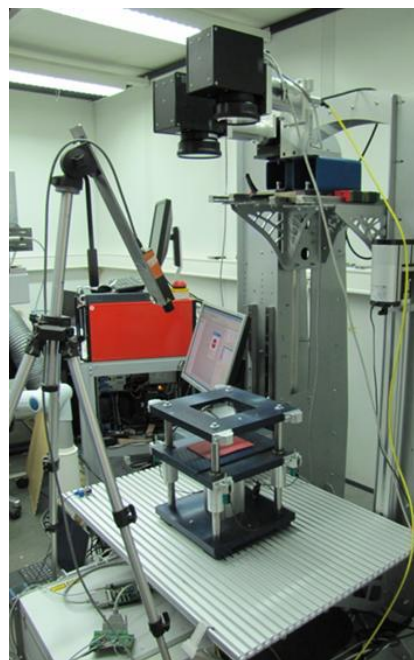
VTT's experimental setup of Dual-head QSLW welding
